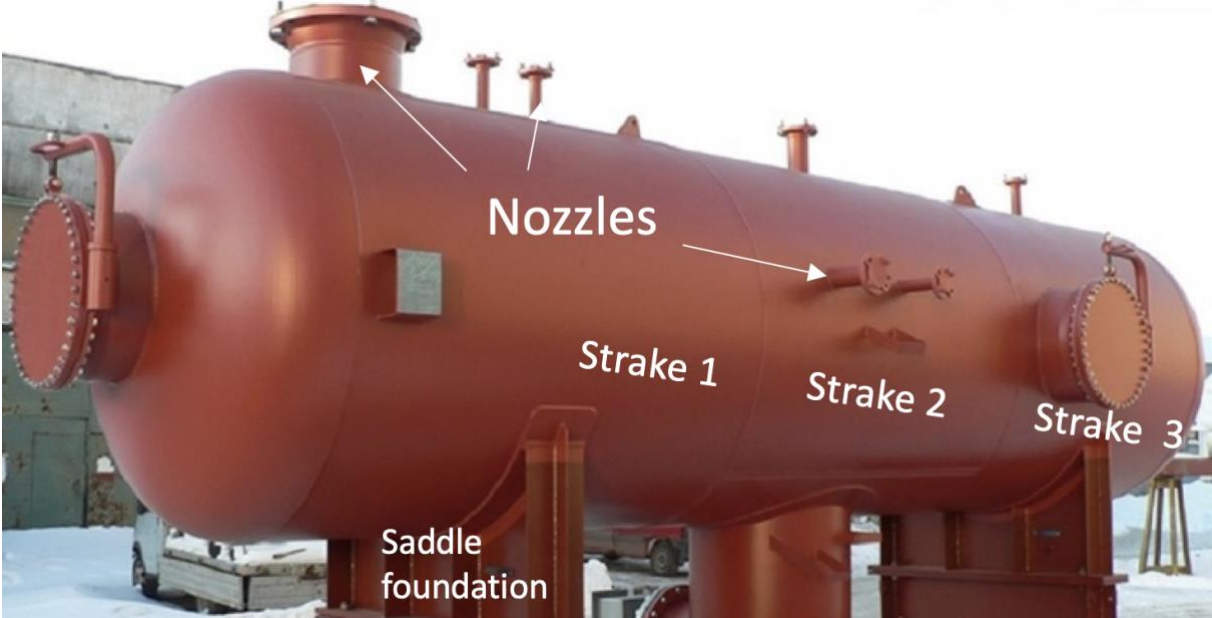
Large Pressure Vessel with indications to the parts that go into it.
